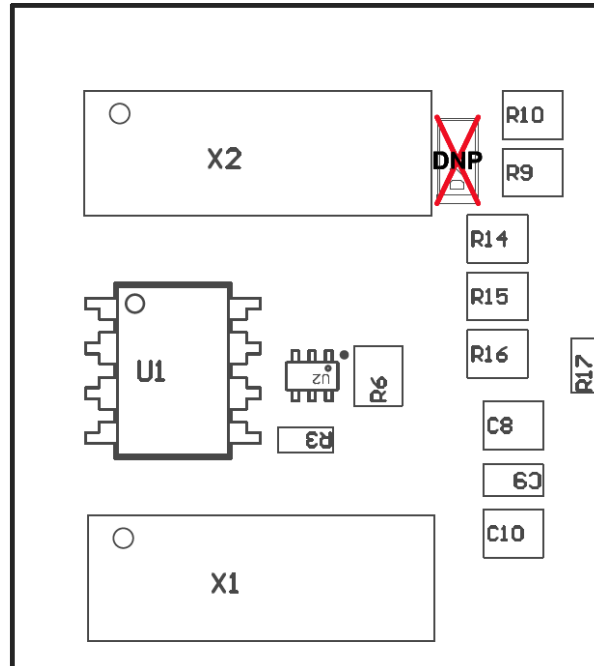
UCC27532EVM-538 Top Layer Assembly Drawing (top view)
